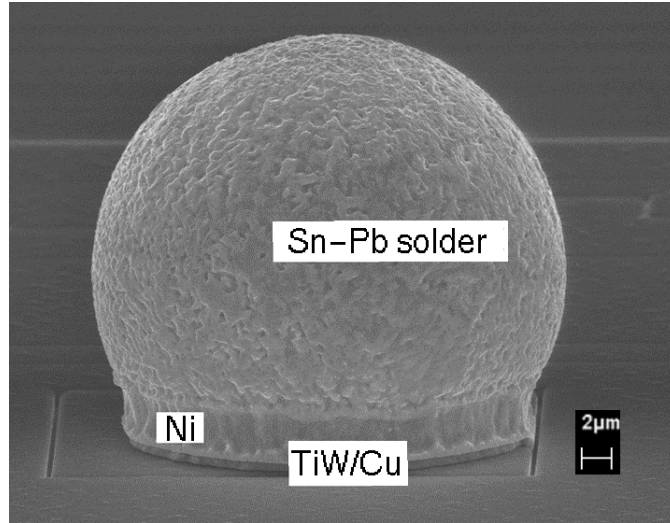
A scanning electron microscope image of a single solder bump showing the metal composition described in the text [58].
